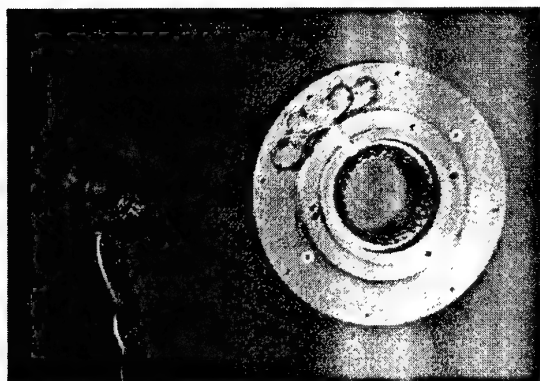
Kearfott Two Piece Resolver (left: rotator, right: stator)
